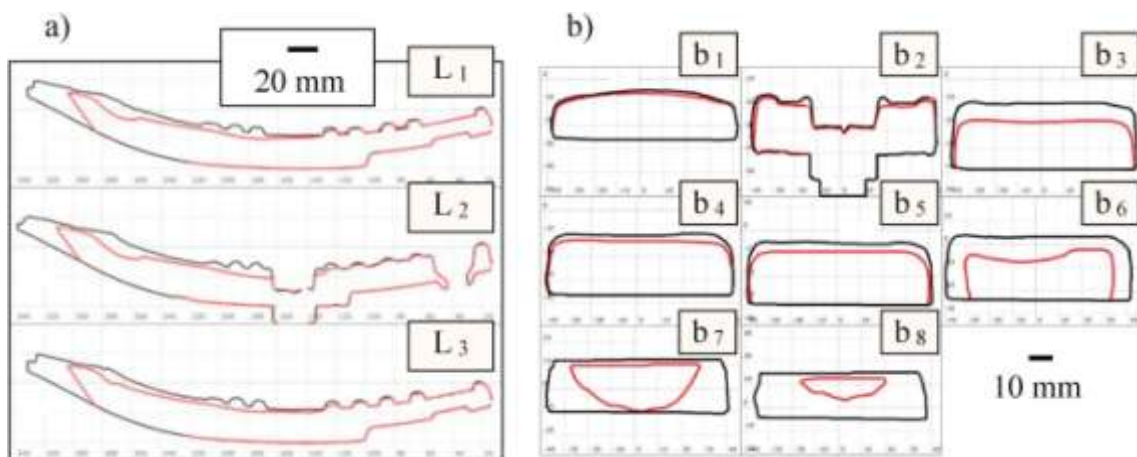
Cross-sections of the A/1 coulters (element installed on the fourth cultivator beam, sliding distance: 1524.9 km): a – longitudinal sections, b – perpendicular sections: b₁, b₂, b₃ – sections in the area of base material, b₄, b₅, b₆ – sections in the area of padding weld, b₇, b₈ – sections in the area of cemented carbide plates.
